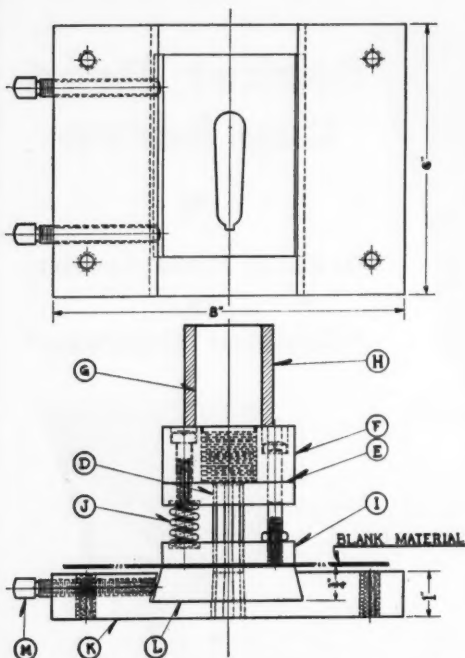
This drawing shows the single slot die that punches the six smaller slots, one at a time, into the blank.
